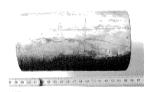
shows chloride SCC in an AISI 304L bottom plate of a urea storage tank in a urea plant located next to the Mediterranean. The corrosion did occur from outside of the bottom plate. Rainwater could
